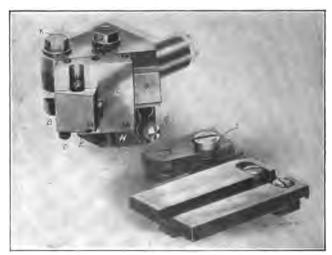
Angular Cutting-off Tool held in Turret and operated by a Ris ng Block
